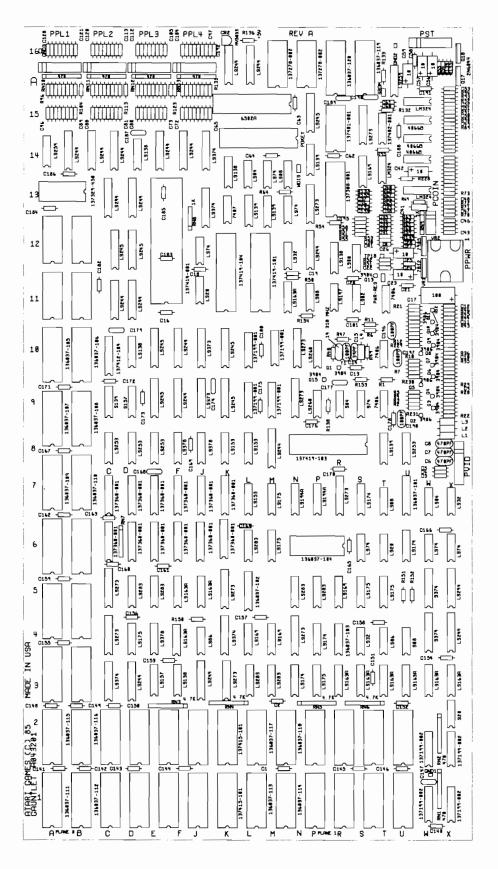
Gauntlet Game PCB Assembly A043201-21 B
